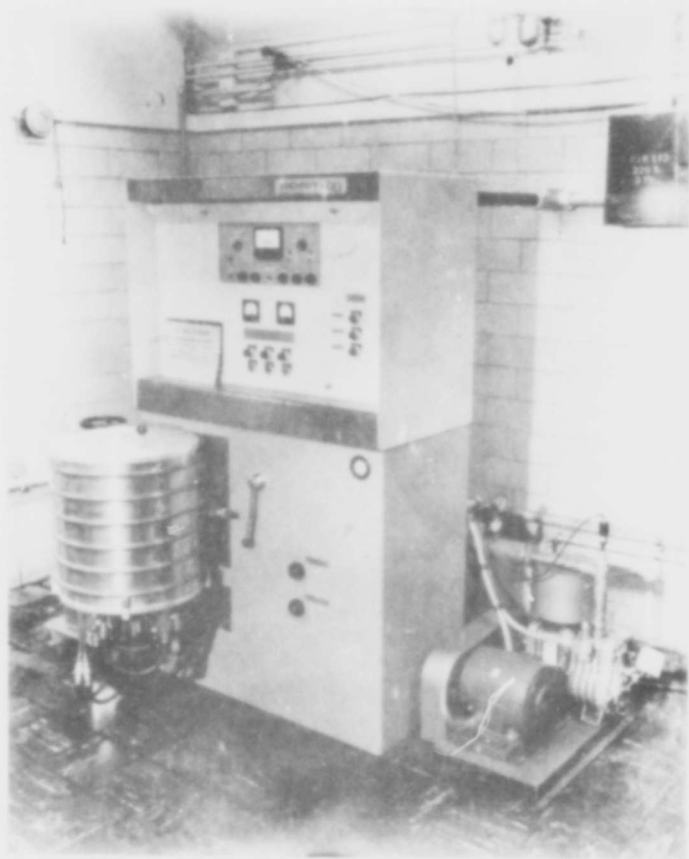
View of ABAR furnace. Vacuum heating chamber is at left center, control panel is center, and mechanical pump is at lower right.
